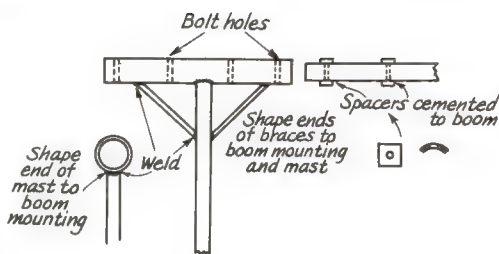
Sleeve-type boom mounting suitable for either one- or two-piece booms.
